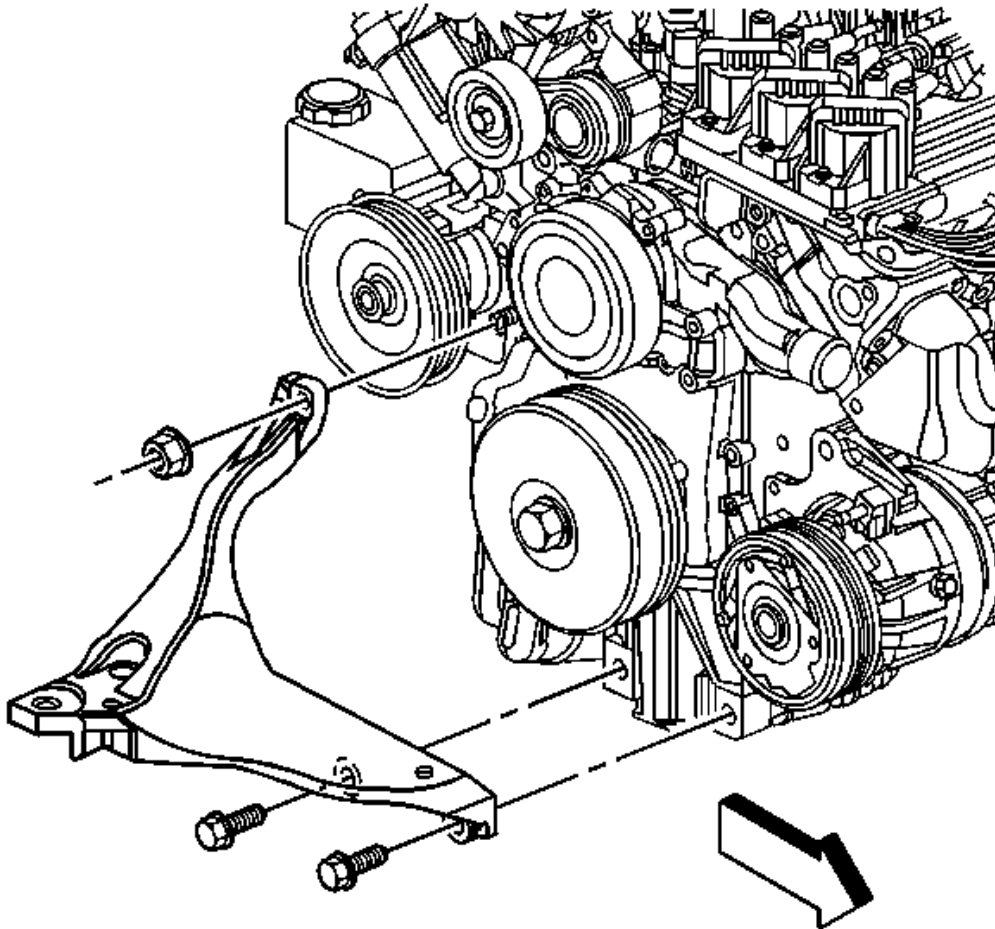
View of Right Engine Mount Bracket, Stud, & Fasteners
